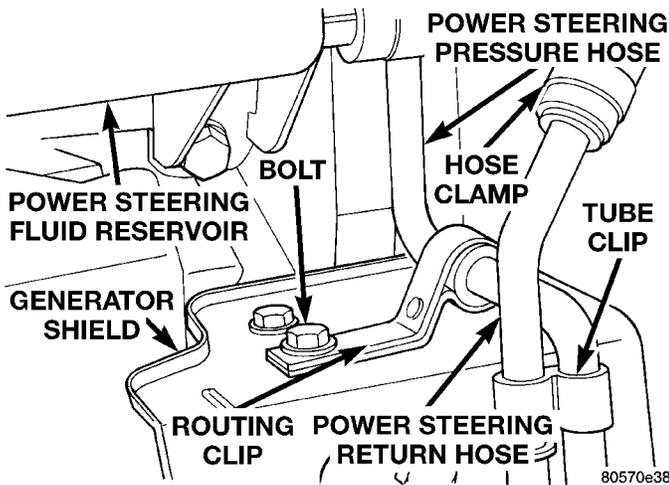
Power Steering Pressure Hose Routing Clip At Generator Shield
